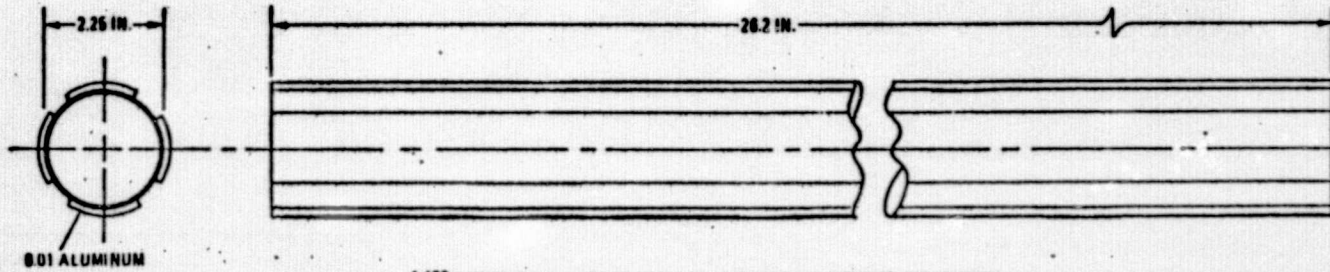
Sketch - Drive Mechanism Housing (typical construction for support)
